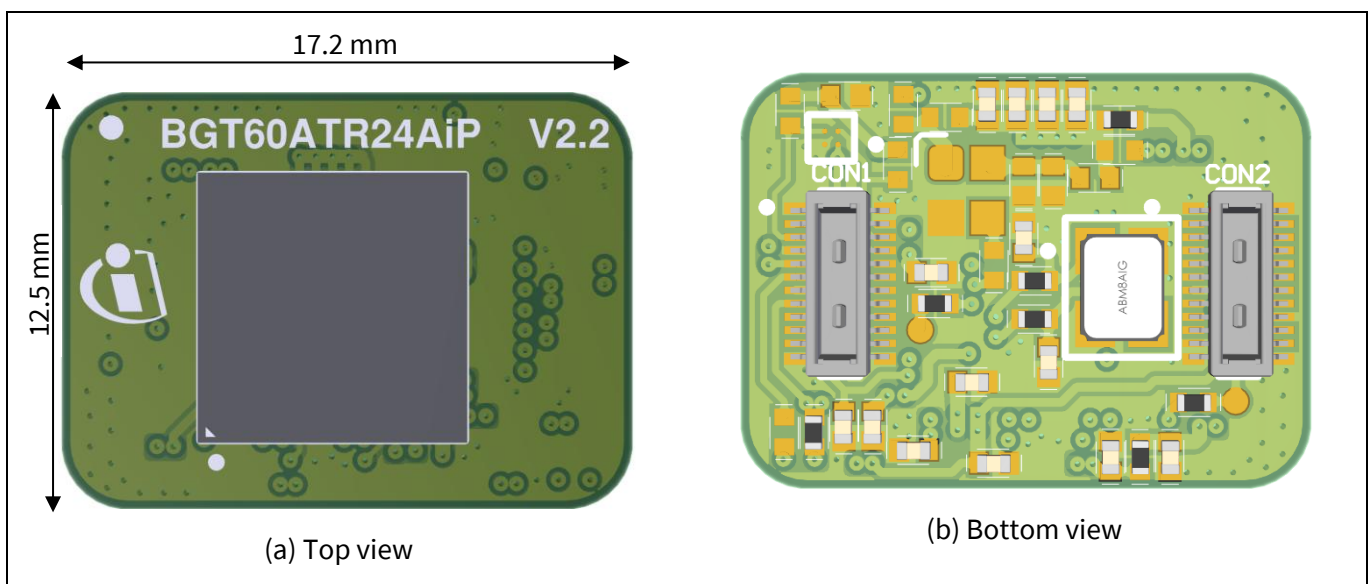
Top and bottom views of the BGT60ATR24AIP shield
